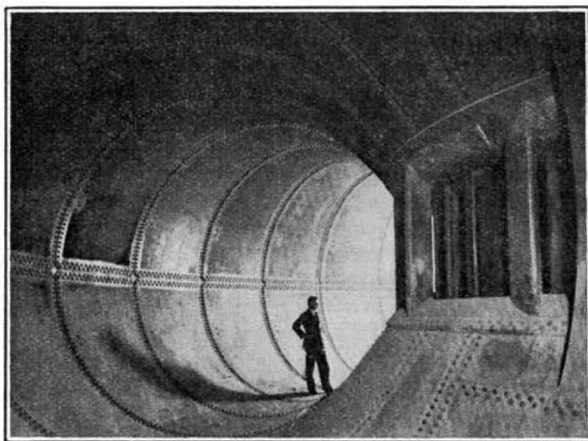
Spiral casing of a 36,000 h.p. turbine.
